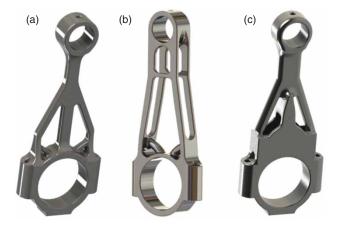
3D CAD model of a connecting rod designed by a CAD user.
